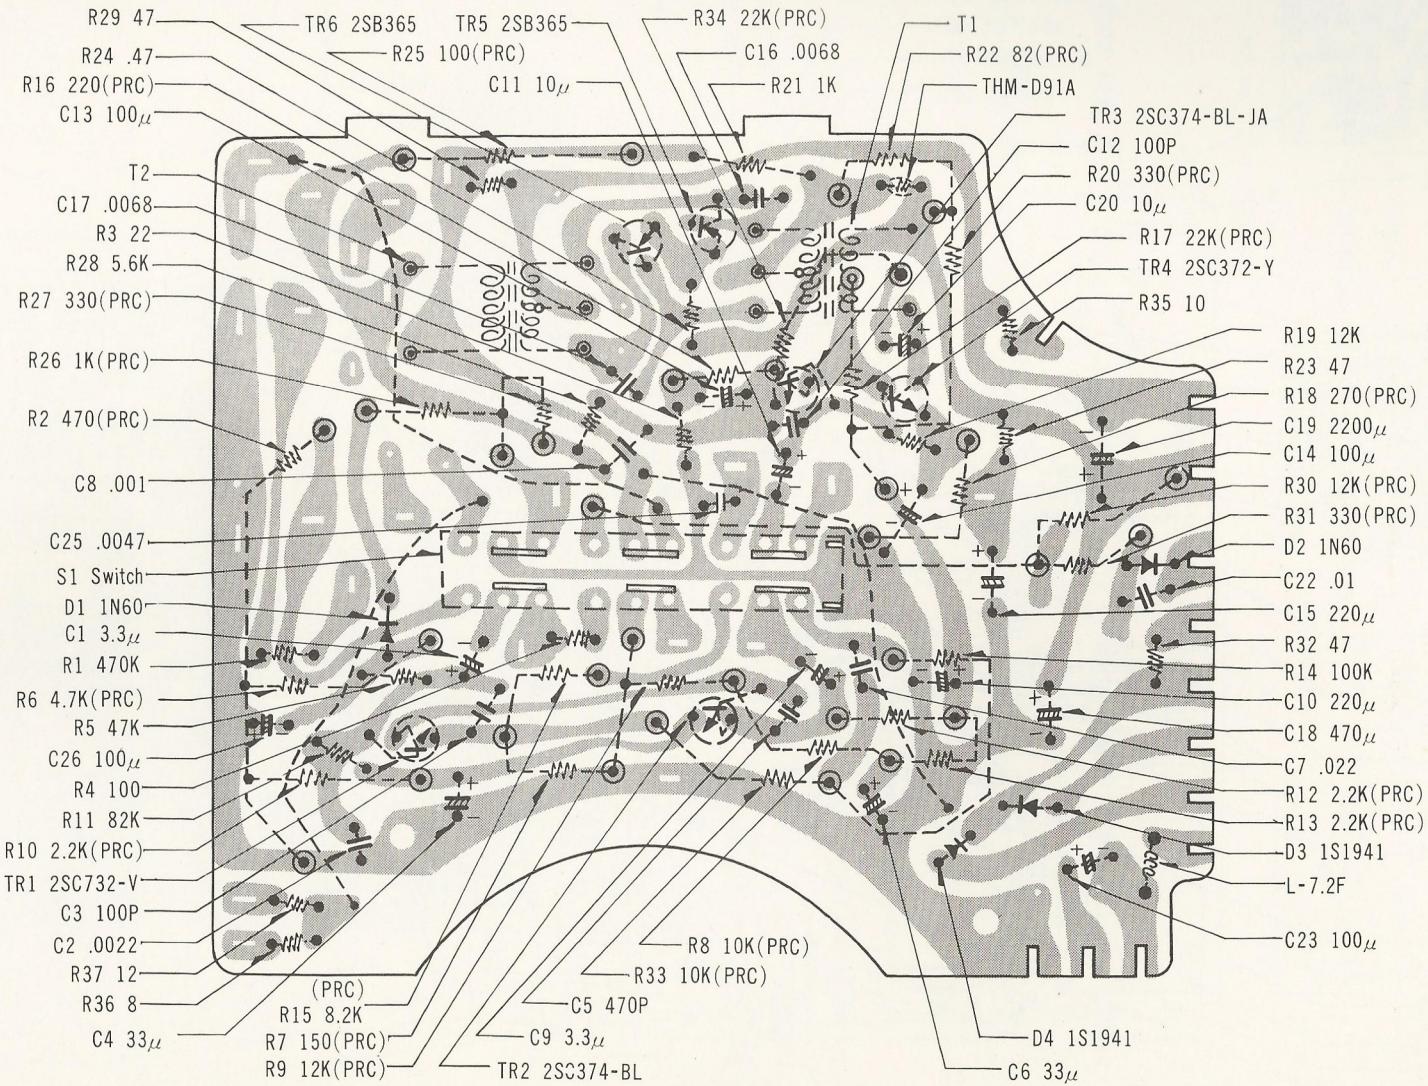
BOTTOM VIEW OF CHASSIS AMPLIFIER SECTION
